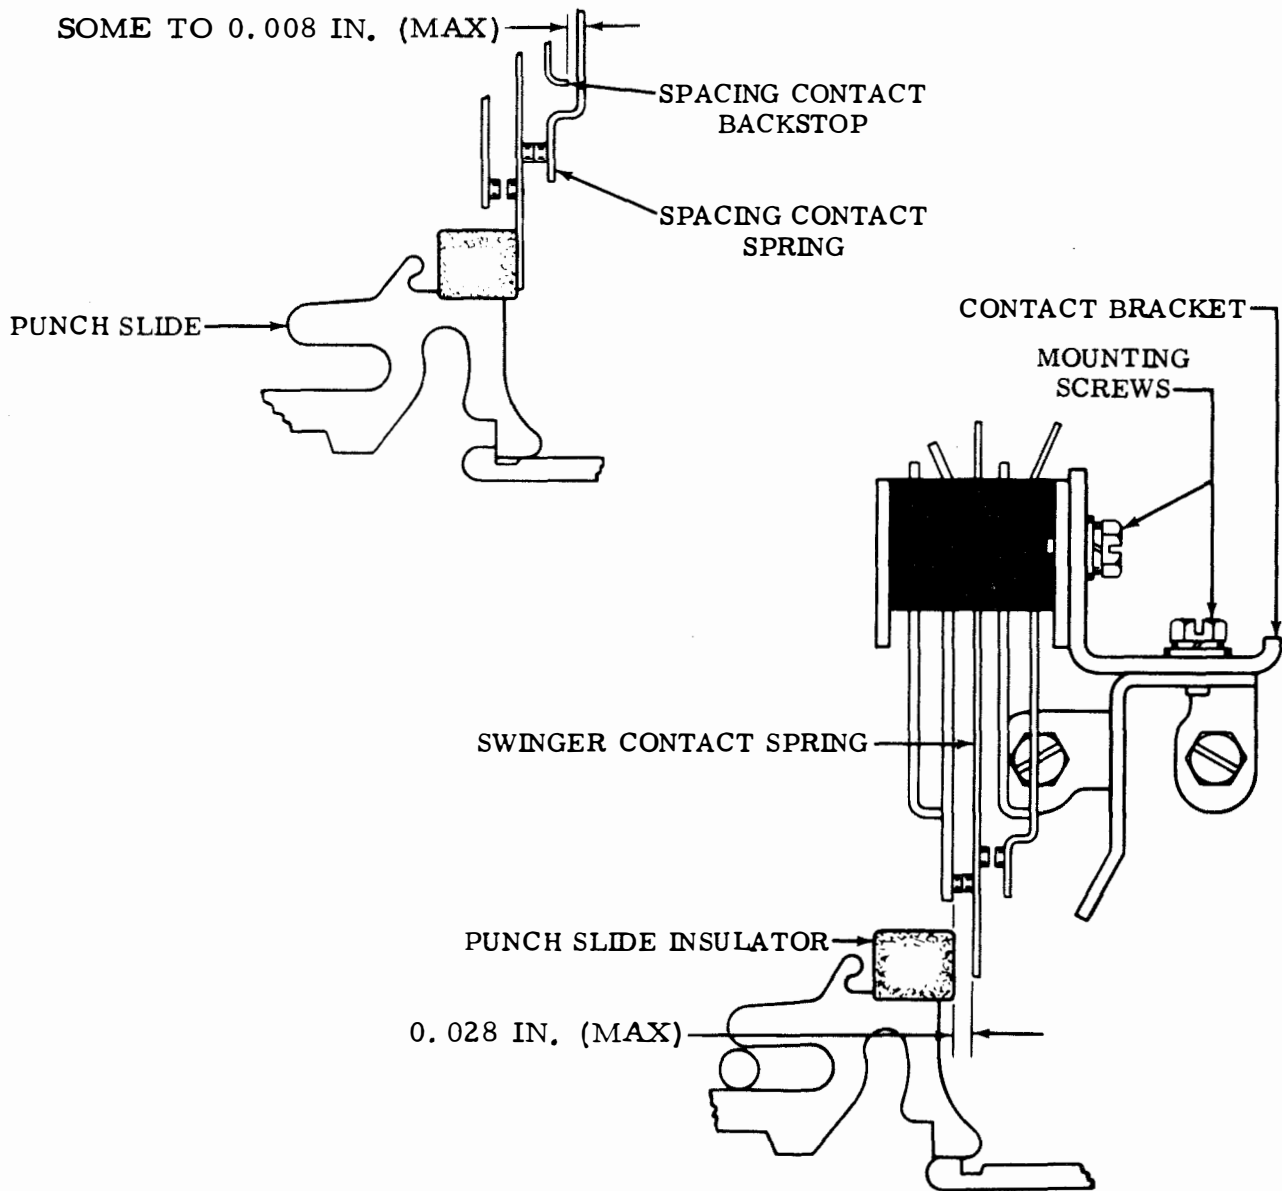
Contact Bracket (Transfer Type Contacts)
